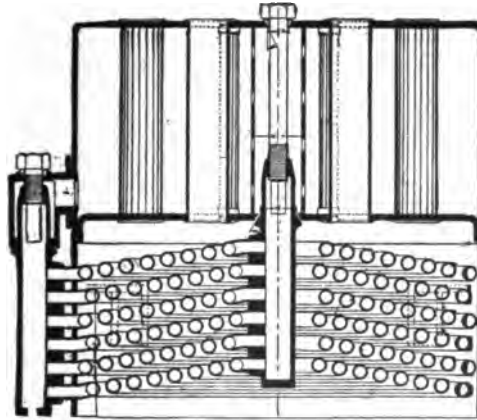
The Geneva Carriage Boiler. This boiler consists of several coils of tubing connected at inner and outer extremities to headers, as shown. The water and steam chamber above is constructed like an ordinary flue boiler.
